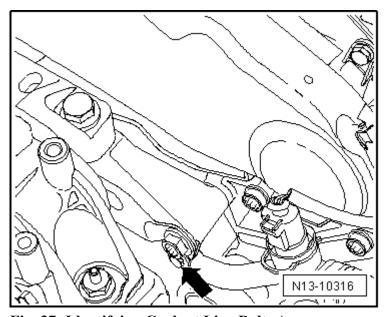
Identifying Coolant Line Bolt -Arrow-
